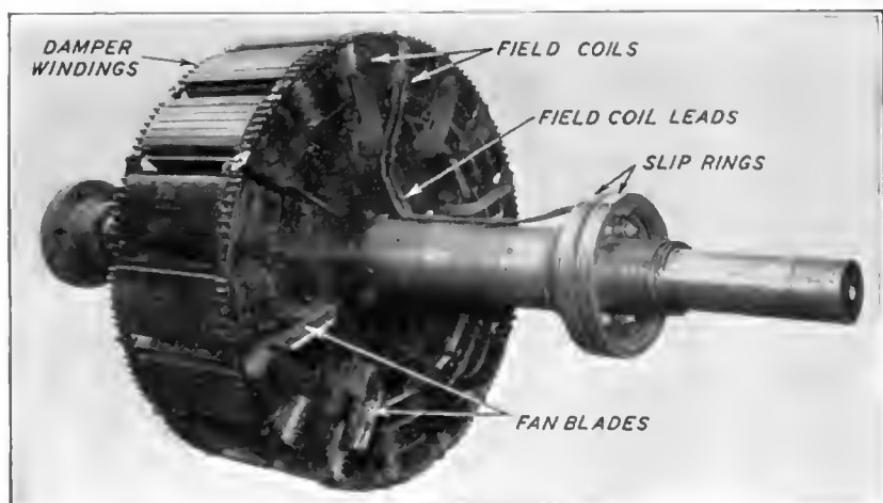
Field Winding Mounted on the Rotor of a Large Alternator
